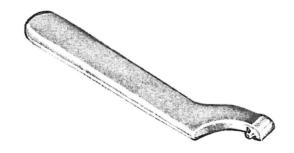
Tools and Equipment (Sheet 1 of 2)
